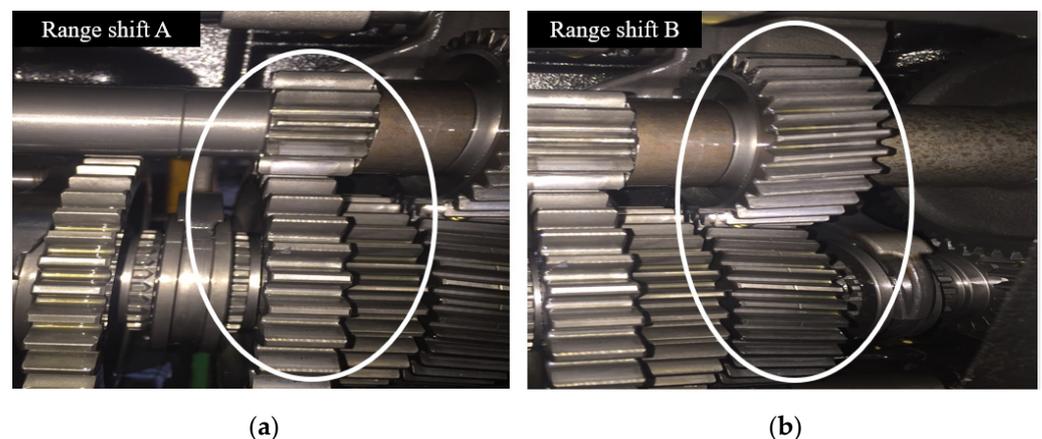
Results of the dynamometer test for the range shift gears: (a) range shift A gears; (b) range shift B gears.
